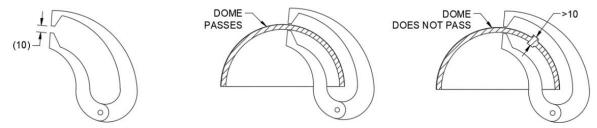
Drawing of lock-joint transfer calipers, set to 10 mm distance between probing points. One example of a dome cross-section which does pass, and one of a dome which does not pass are shown.
